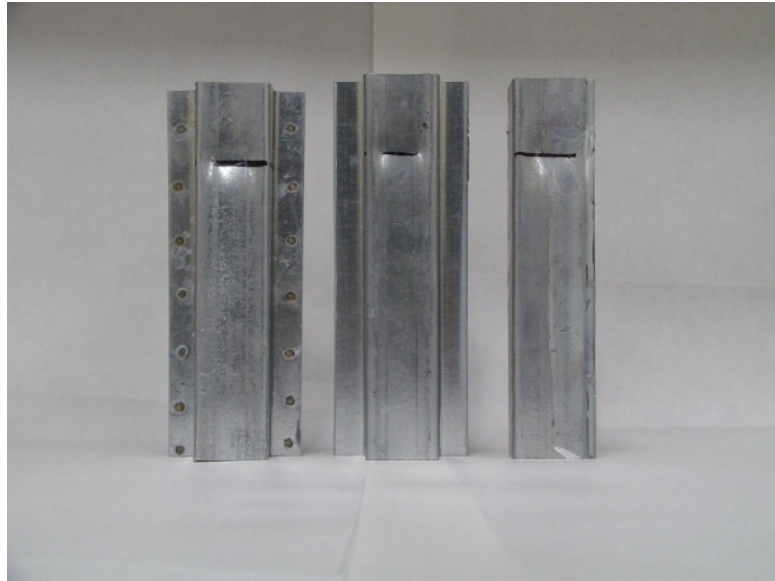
Assembled crush tubes, from left to right: welded hats, bonded hats and bonded channels
